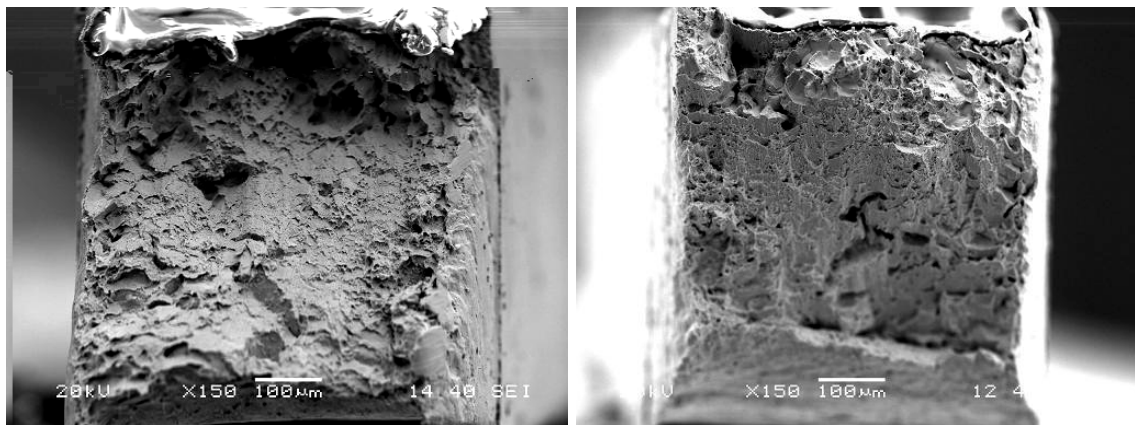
Fracture surfaces of the as-prepared sample having thin (3.9 μm) Ni-P layer showing ductile fracture inside the bulk solder.
